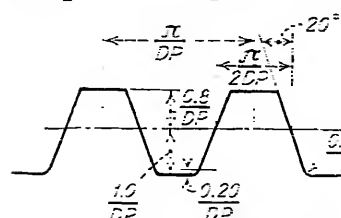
Basic rack of 20-deg. stub-tooth gear system.
